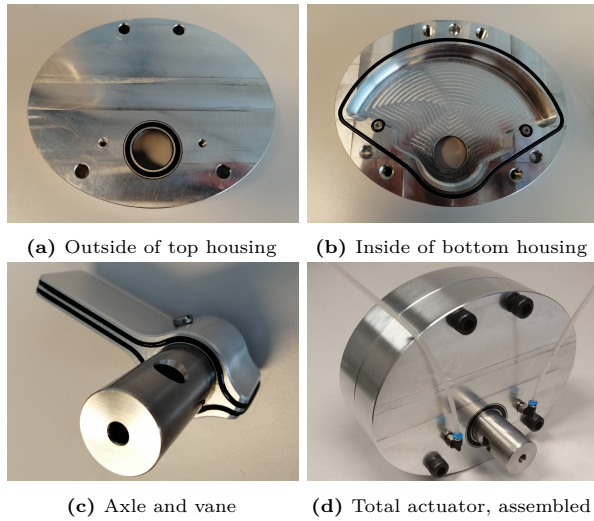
Pictures of (a,b,c) the different parts including O-rings and bearings and (d) the total assembled actuator.
